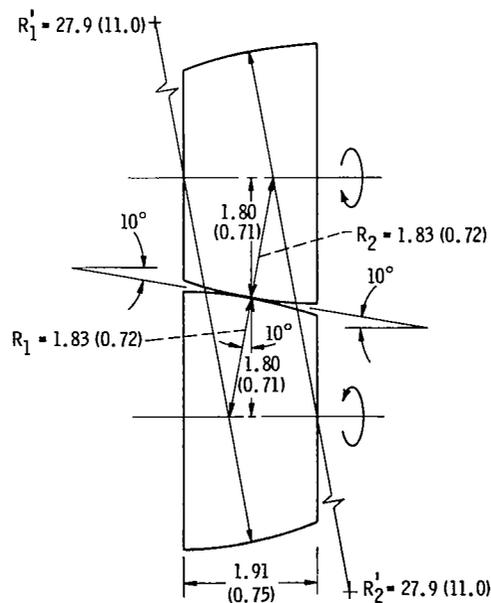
Contacting disk geometry. (All linear dimensions in cm (in.))
